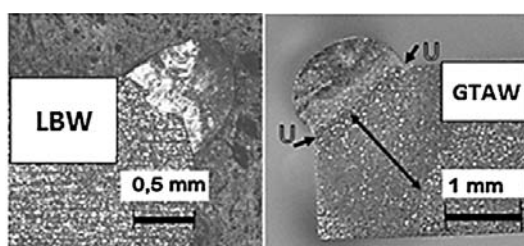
Macrosections of welds made using LBW (left) and with the GTAW process (right): T - width of HAZ, U - weld undercuts
